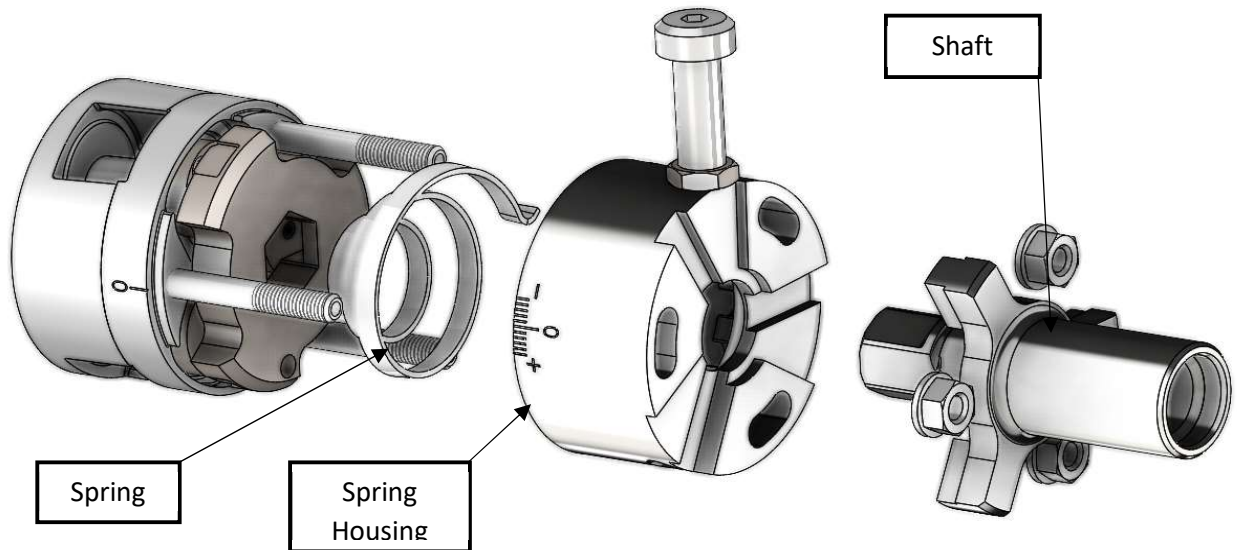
189 ER-01 Attachment with Option Packages Exploded View
